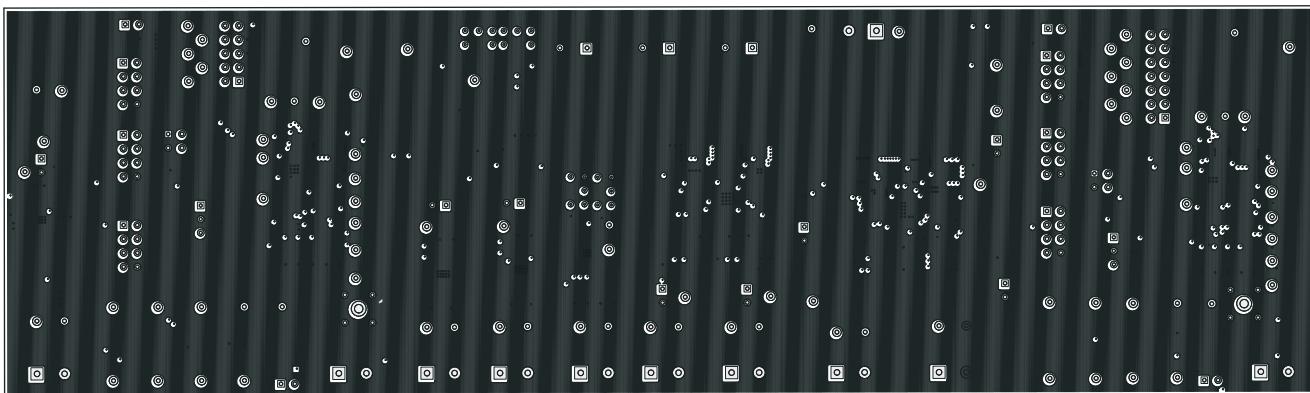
TPS59610EVM-634 Internal Layer 2, Top View
